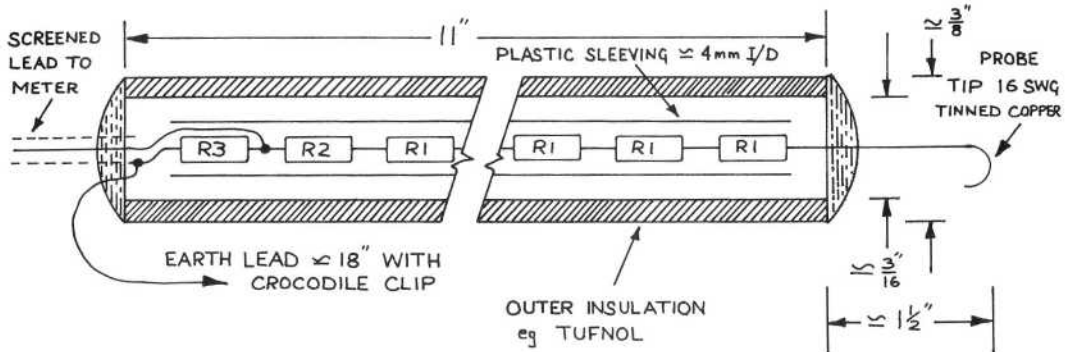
EHT PROBE ASSEMBLY [NOT TO SCALE]
